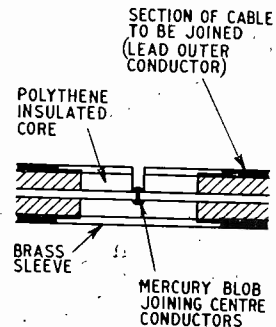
Coupler for joining two lengths of coaxial feeder.
